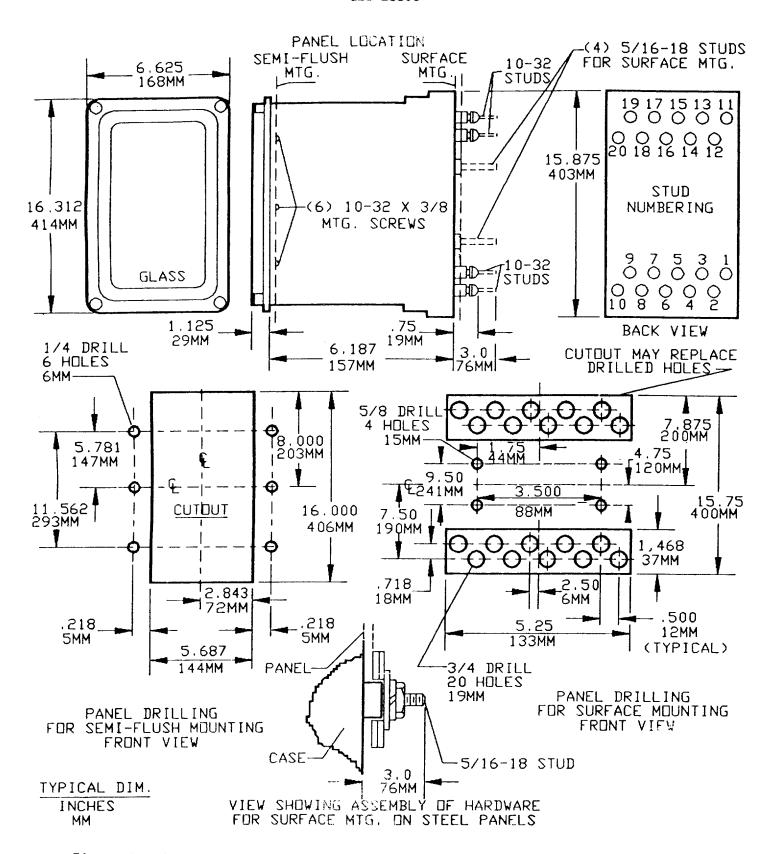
(K-6209274-6) Outline and Panel Drilling Dimensions for Size M2 Case
